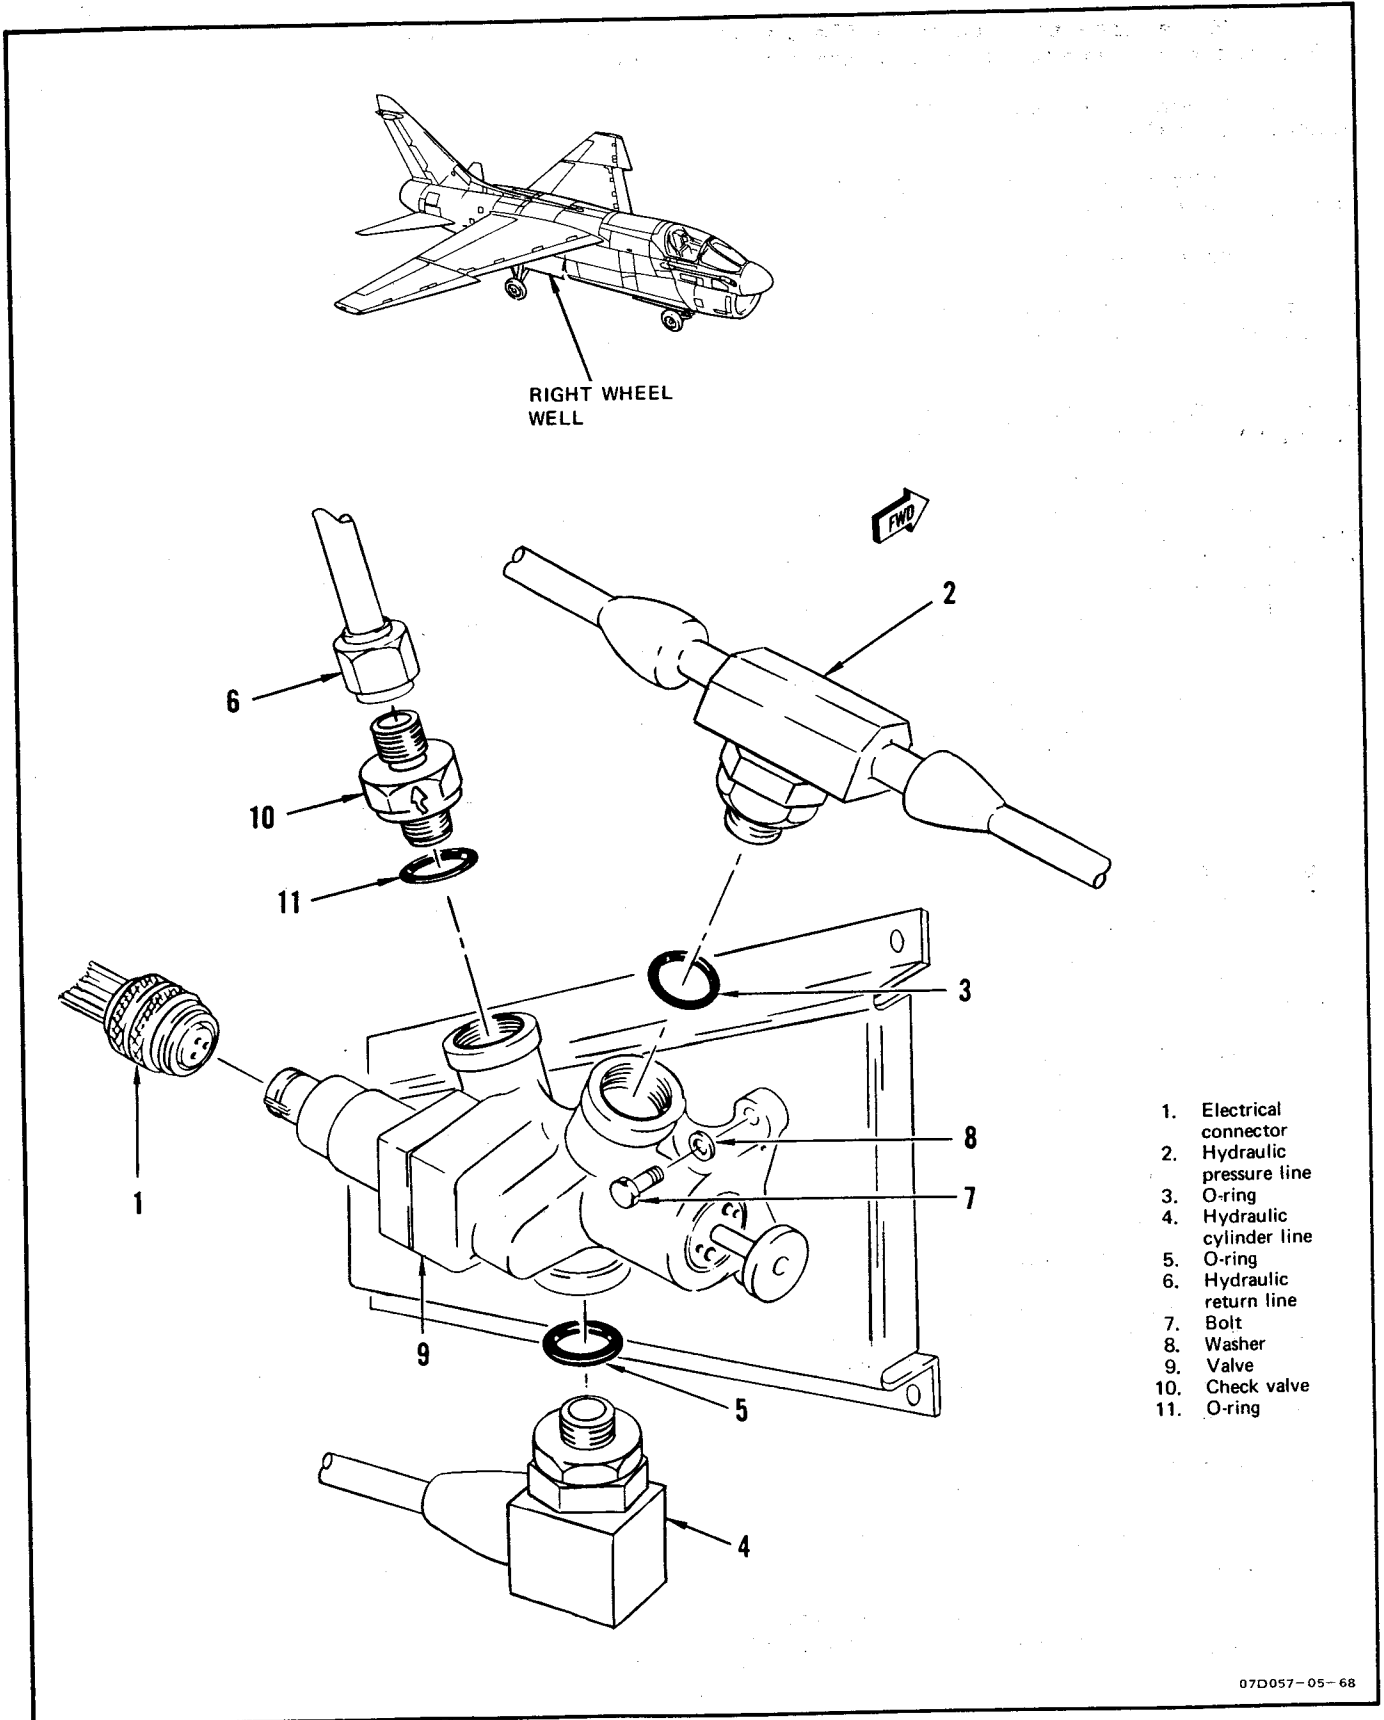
Arresting Gear Selector Valve Removal and Installation
